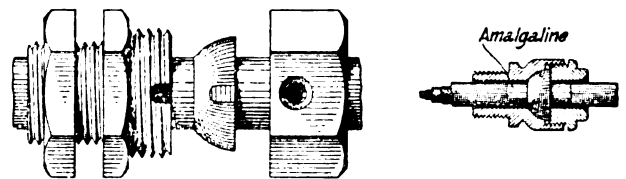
BULKHEAD FITTING WITH CABLE DRAWN OUT TO SHOW PIECE CAST ON. FIG. 2.—SMALLER GLAND FOR SWITCH-BOXES, &c.
